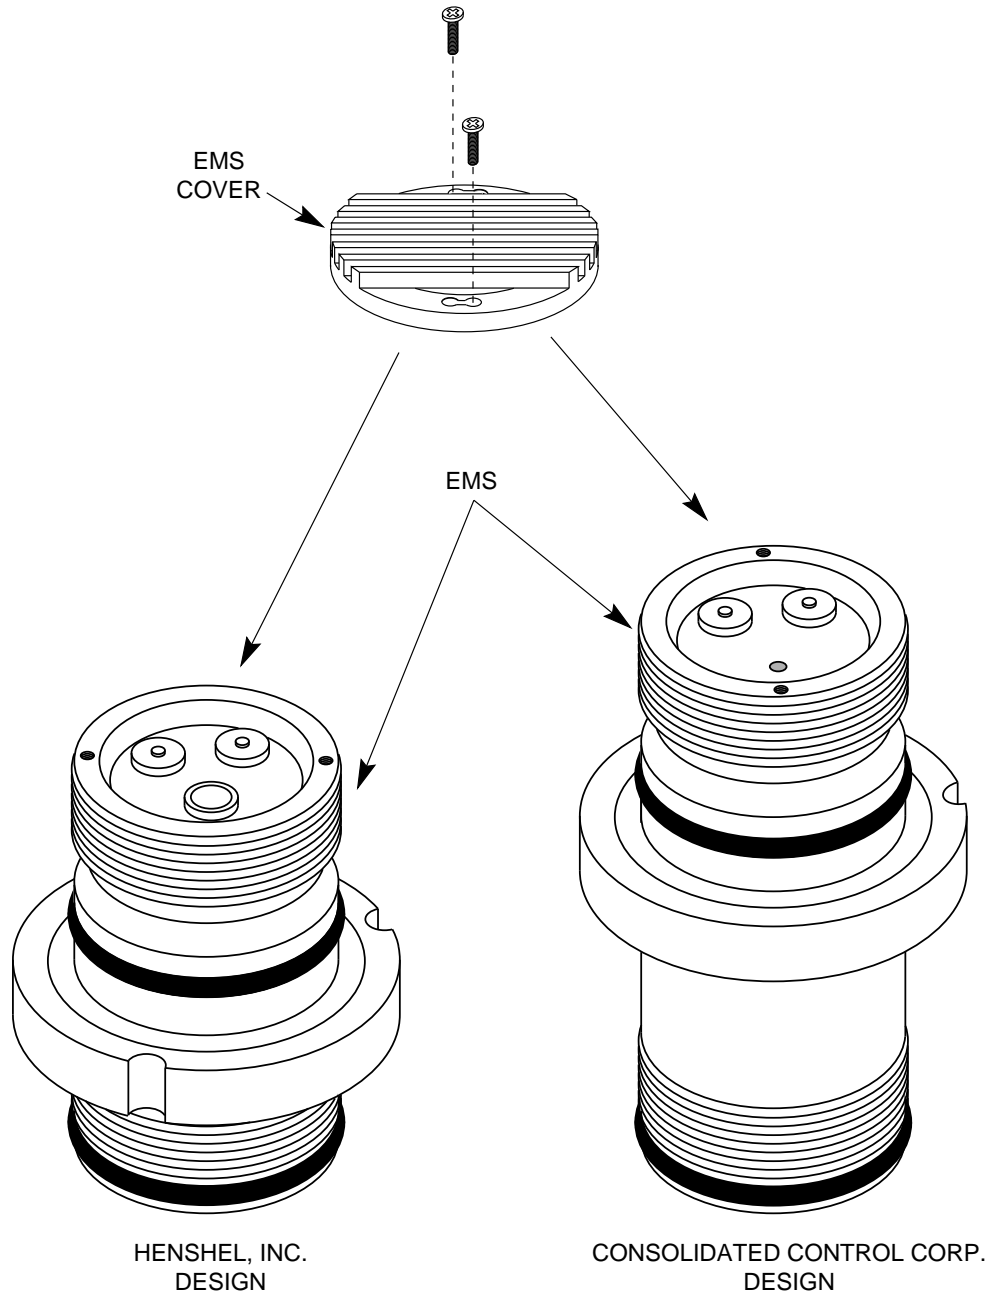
Environmental Monitoring Sensor Assembly
